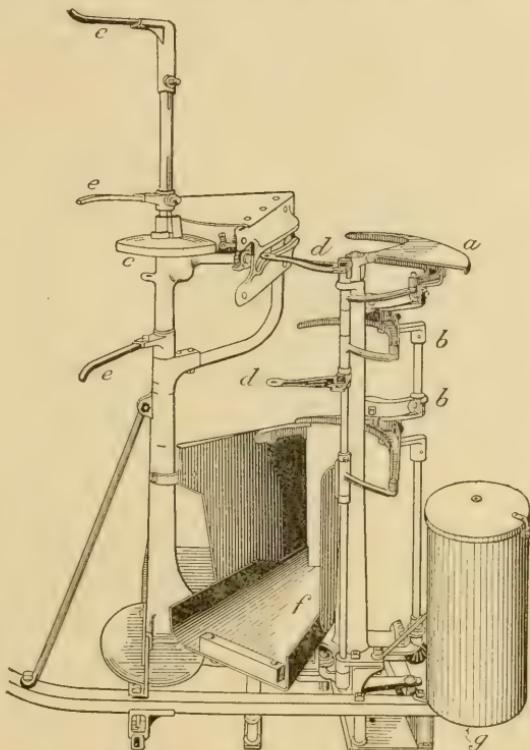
Binder attachment: *a*, needle; *bb*, packers; *c*, knotter cam; *dd*, compressor hook; *eee*, discharge arms; *f*, Butt table or butt shoe; *g*, twine cam.
